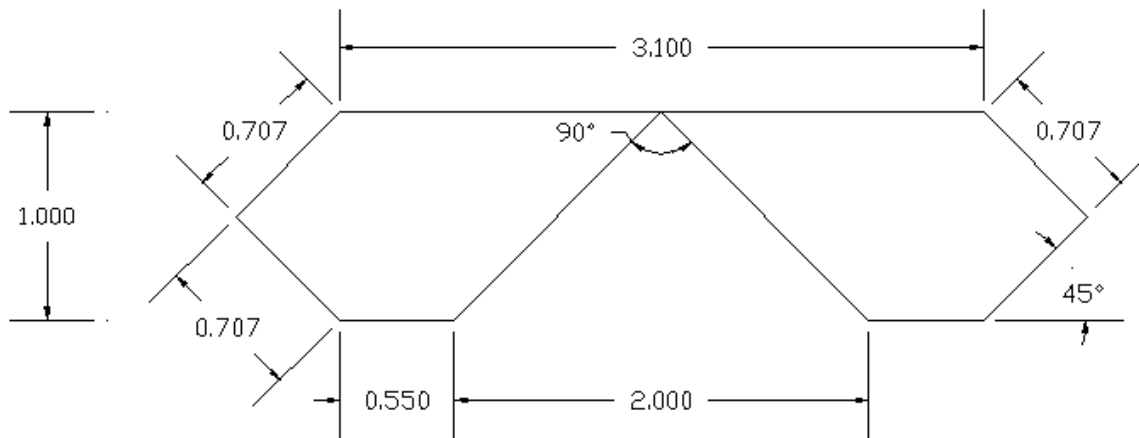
Cross-section of the original-shape column (unit: inches)
